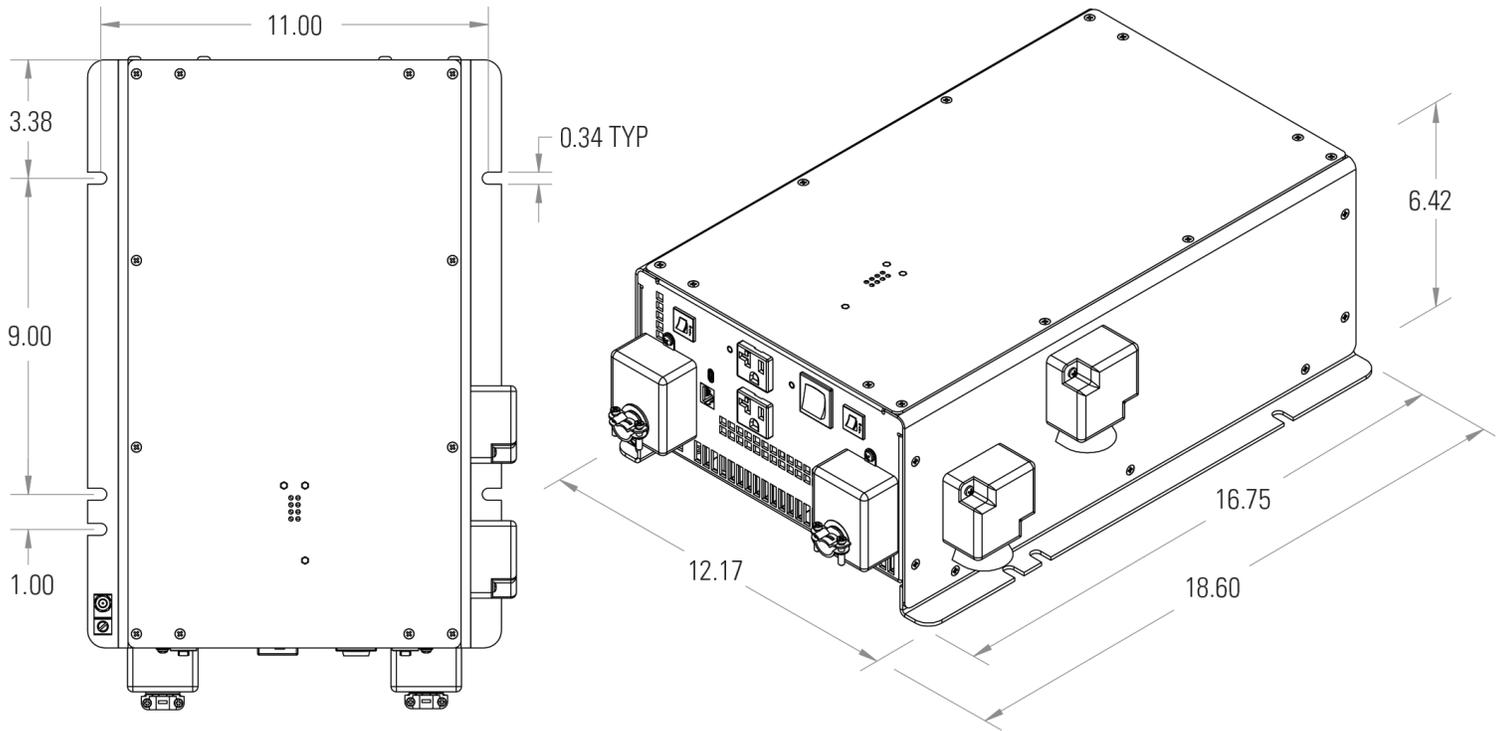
IPSi2405 top and isometric view with dimensions in inches.
